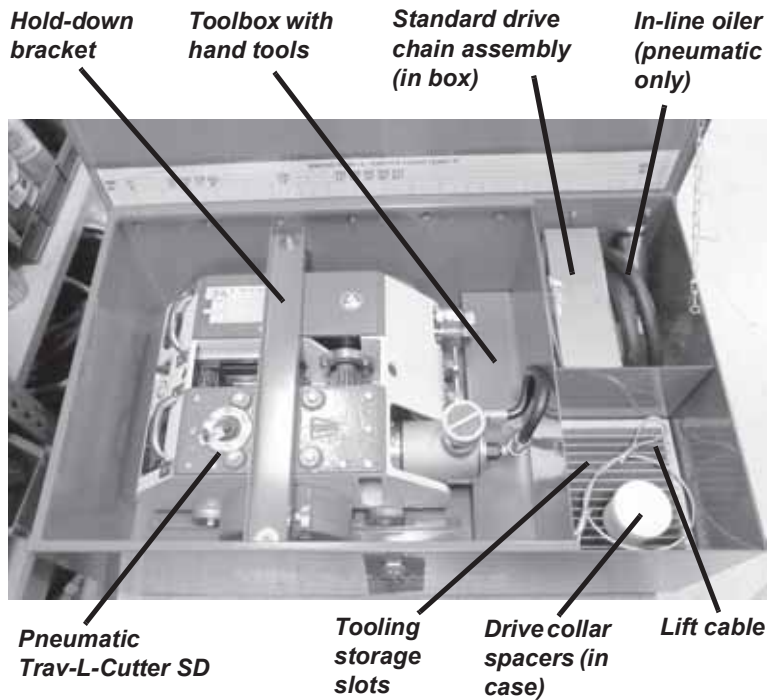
The Trav-L-Cutter SD and accessories in its storage case.
